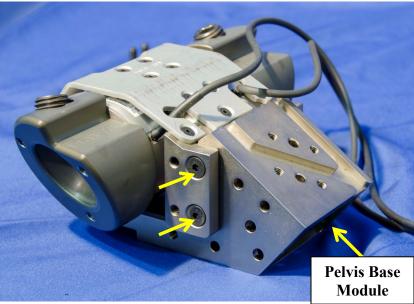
Mount sides of pelvis base module to pelvic box assembly
